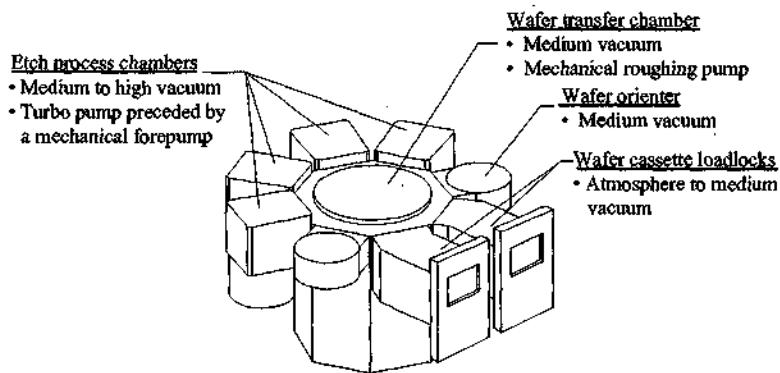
Cluster Tool Layout with Vacuum Environment
